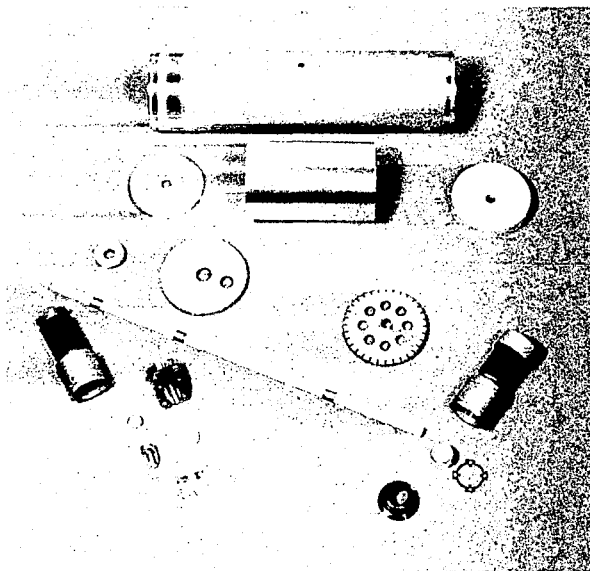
Tube parts for single bore, single cathode metal-ceramic laser.
